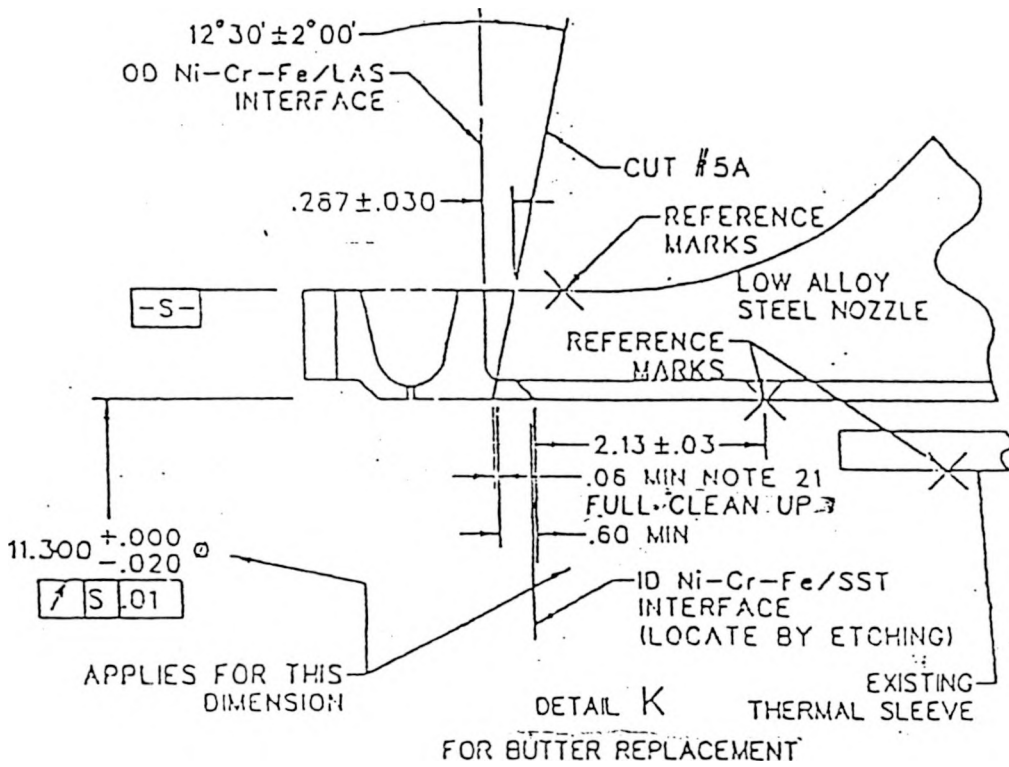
WELD OVERLAY FOR N2E-F1
